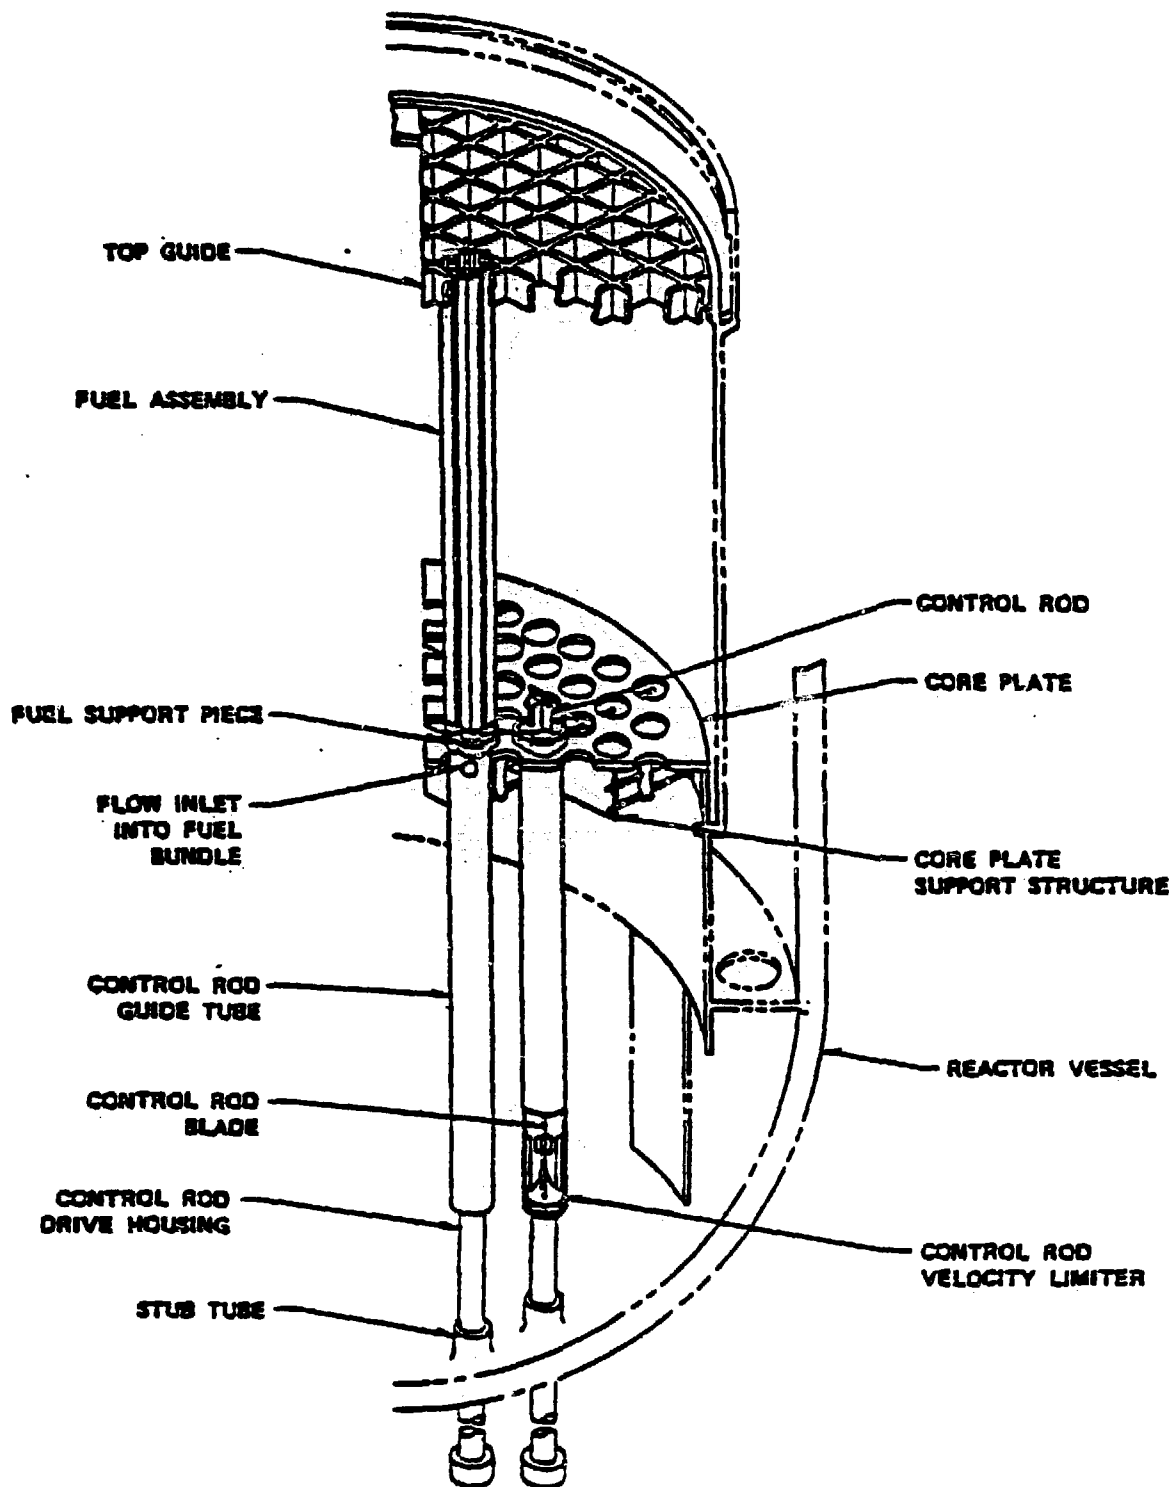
The BWR core plate separates the core region from the reactor vessel bottom head. The core fuel assemblies are supported by the fuel support pieces, the control rod guide tubes, the control rod drive housings, and the stub tube welds.
